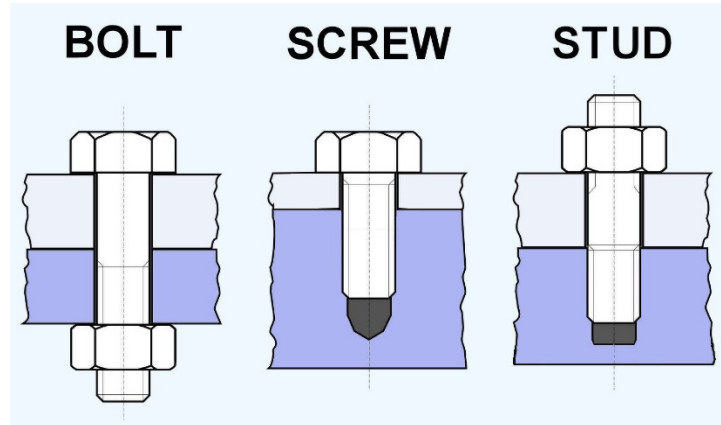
<http://engineerexplains.com/answer/Screw-vs-Bolt1.html>
